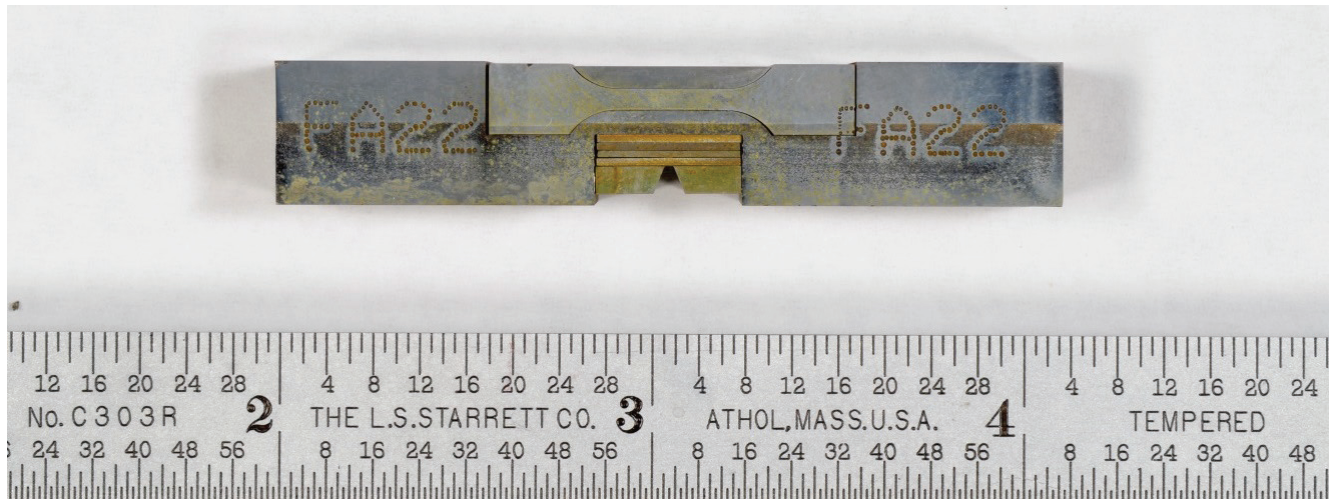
Charpy block FA22 had the smallest weld cross section for machining SS-3 and microstructural specimens. A 1x4 array of microstructural specimens was used to ensure they were taken from weld, rather than the 2x2 used in the base metal machining shown in Figure 38 [17].
